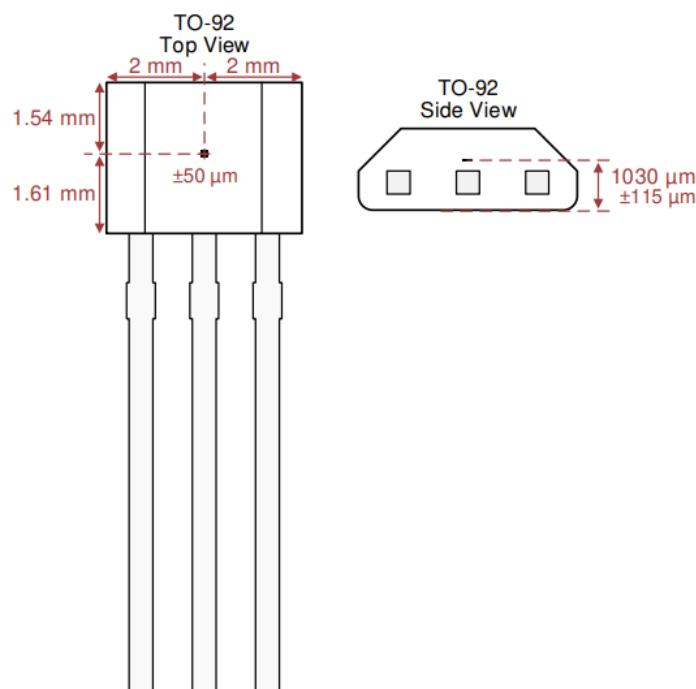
Location of Sensing Element Within TO-92 Package of DRV5056
